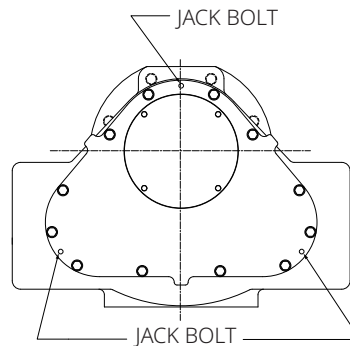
HP65/HP80 Canted Yoke Orientation for Assembly
